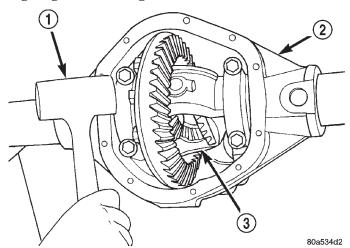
Seat Pinion Gear Dummy Side Bearing
